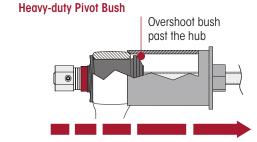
Heavy-duty Bush Tool Configuration AFTER overshoot
